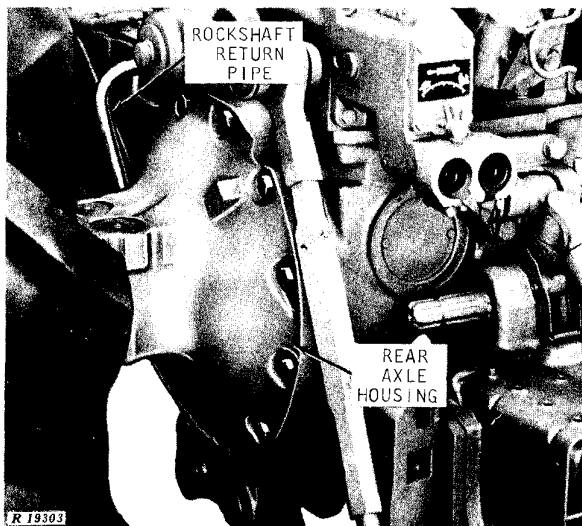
Rear Axle Housing (Sound-Gard Body removed for illustration purposes)
